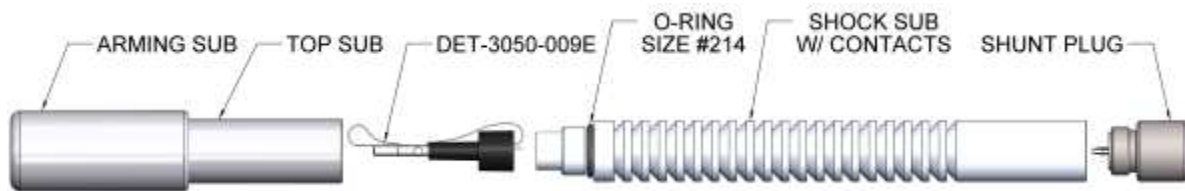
Exploded Arming View of Tubing Cutter Using DET-3050-009E
